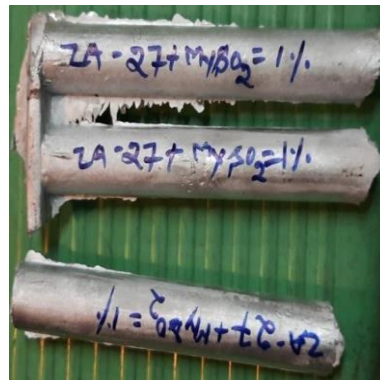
ZA 27 with 1% MoS₂ moulded specimen
